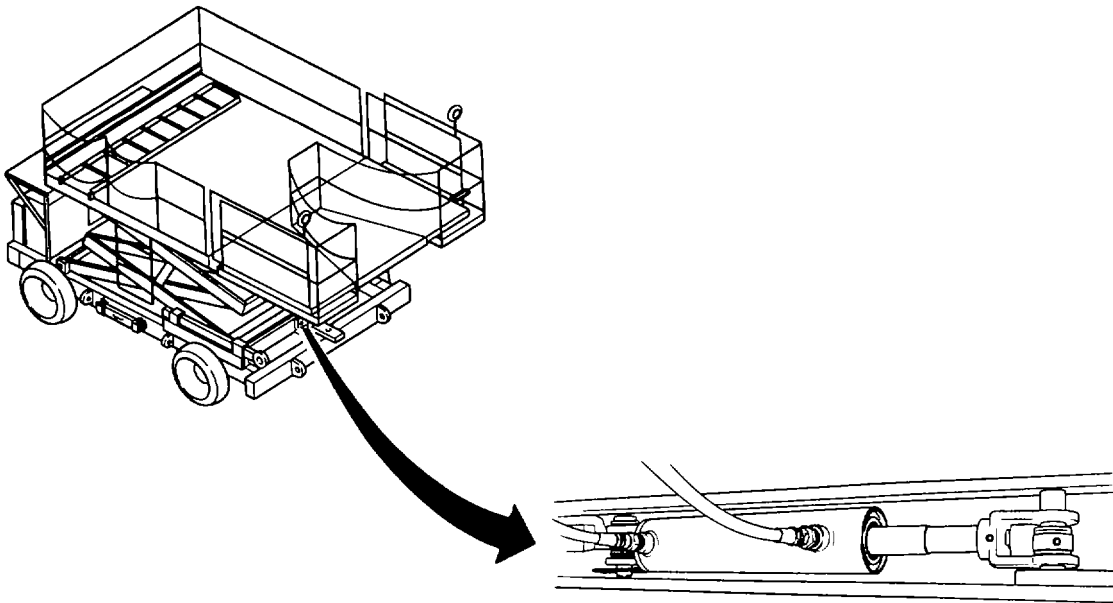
Steering Cylinder (Sheet 1 of 2).
